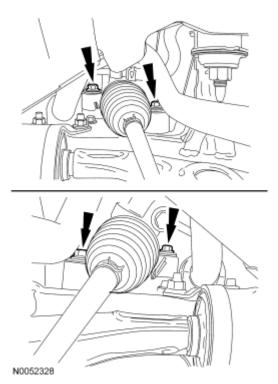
Locating LH Subframe-To-Lower Bumper Nuts
